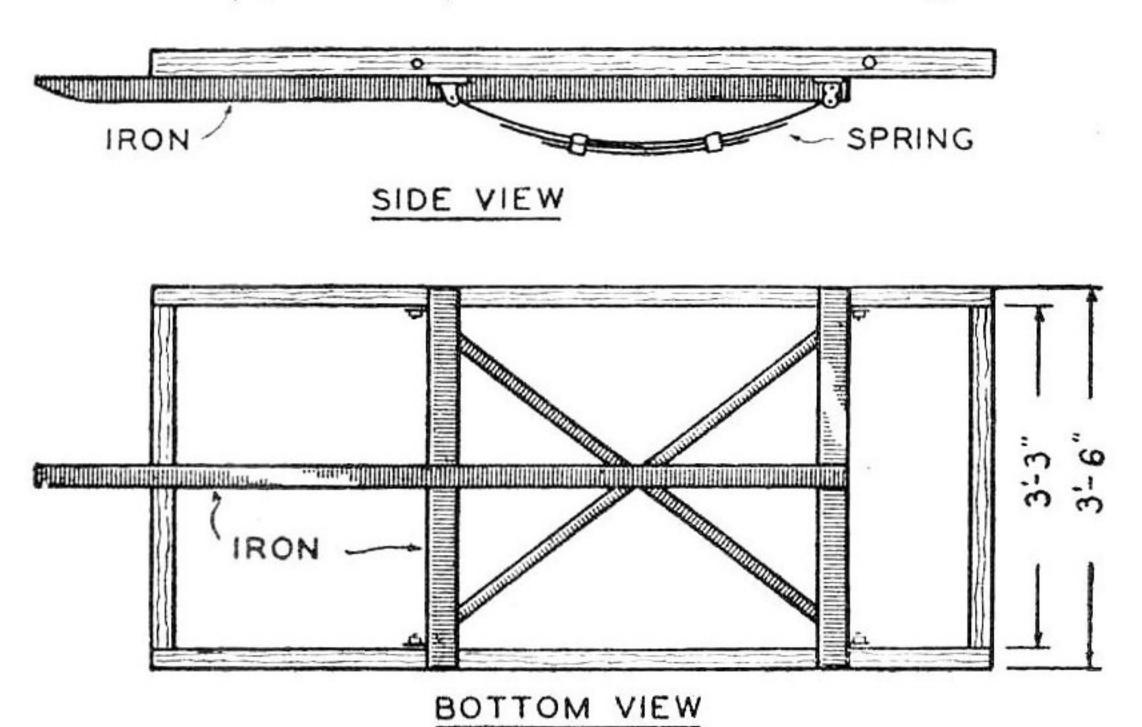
The angle iron cross braces should be welded, as explained in the accompanying text.
